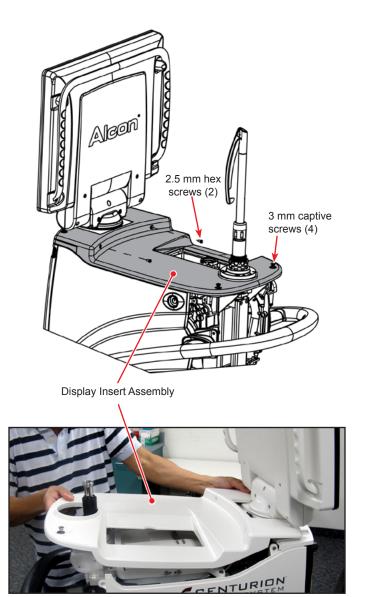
Removal of Display Insert Assembly (AS system shown)
